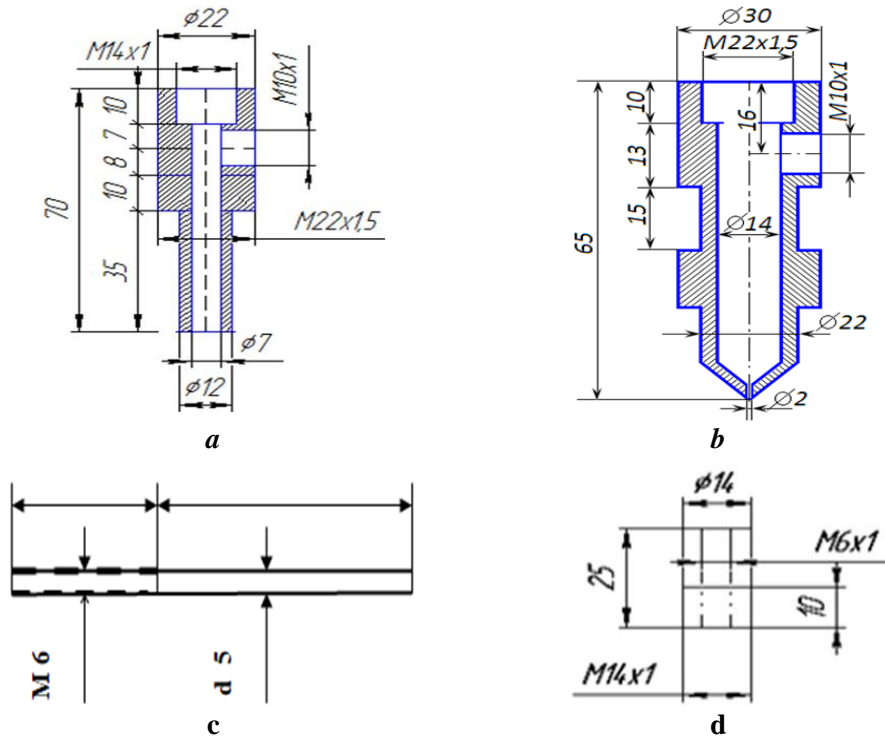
Detailing of the pneumatic sprayer: a - inner cage; b - outer cage; c - inducing axis; electrode; d - contact control sleeve
